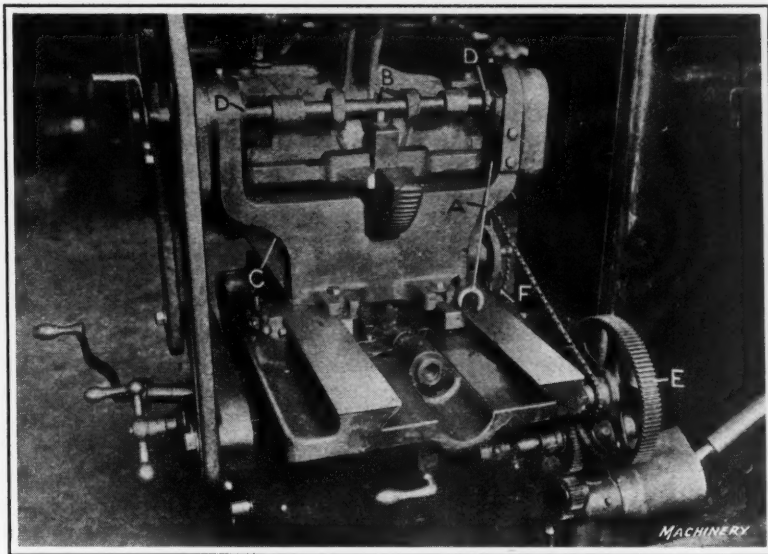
Milling Machine equipped with Hinged Fixture for Use in performing Gang Milling Operations on Circular Segments
